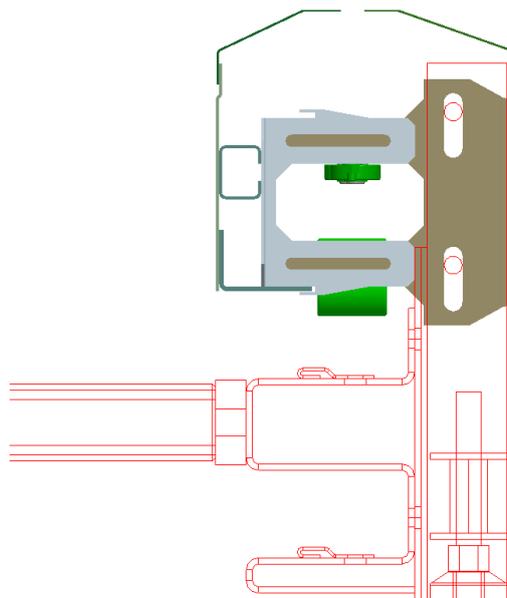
Solution 2, handrail guiding system and fixings for visual panels
